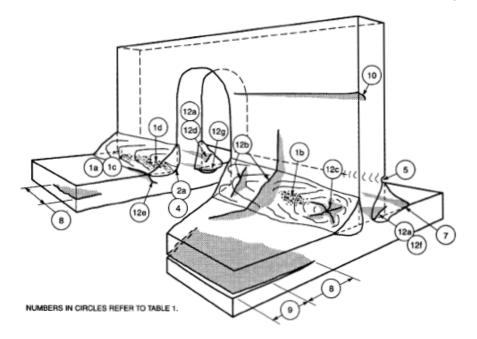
Double-Bevel-Groove Weld in T-Joint
